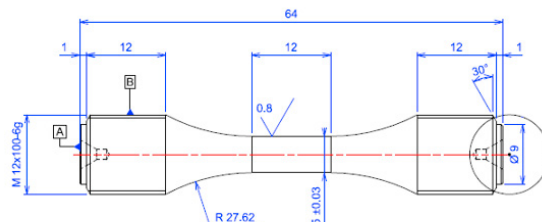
Geometry of the machined specimens used for the HCF fatigue tests
